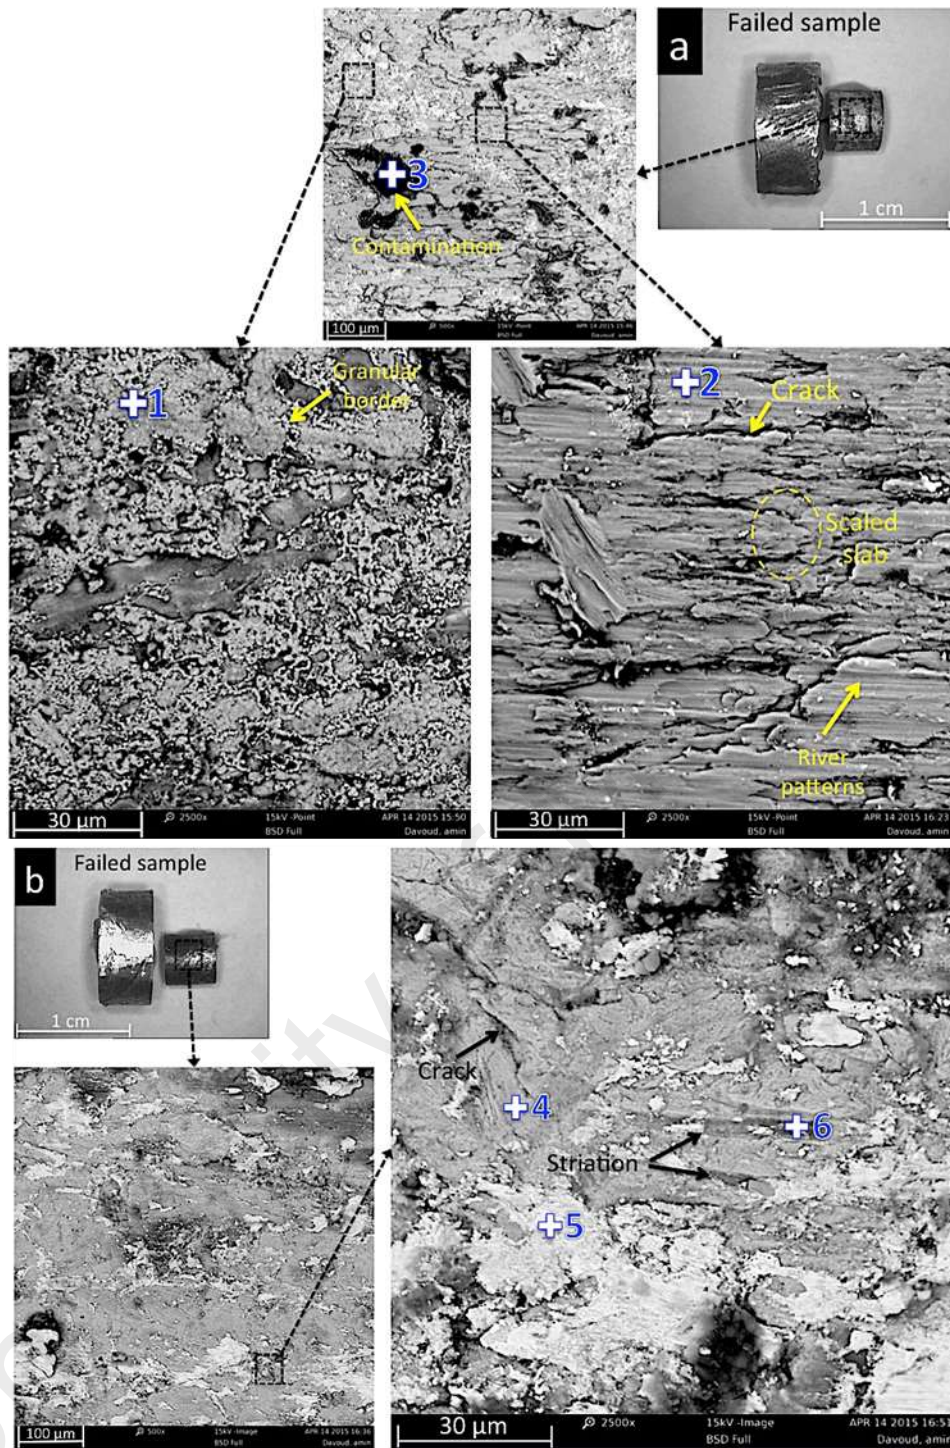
Fractographs of failed workpieces annealed at 520⁰C for (a) joint without interlayer and (b) joint with interlayer
